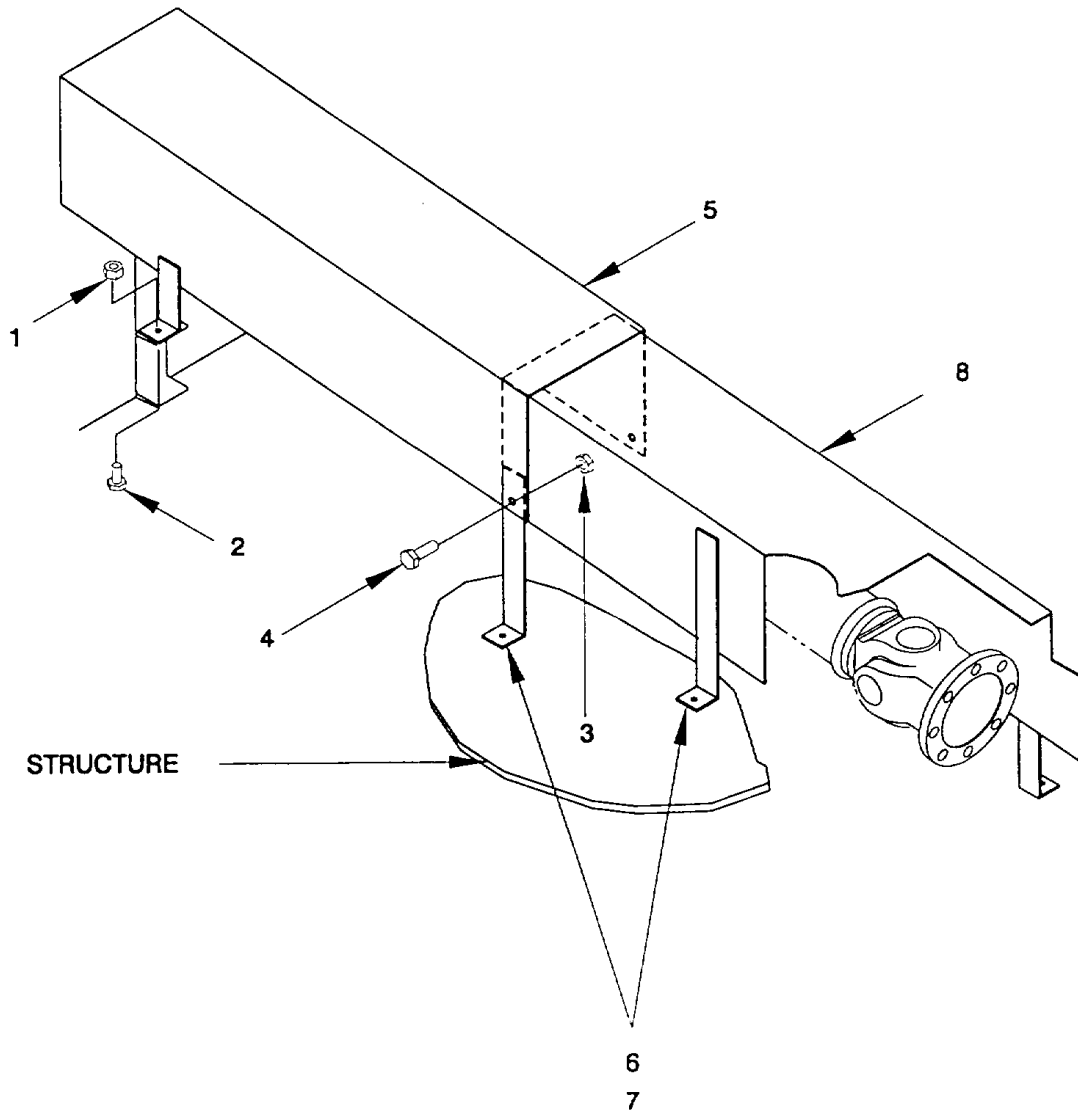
Machinery Guards, Marine Gear to Transfer Case, Remove/Install.
